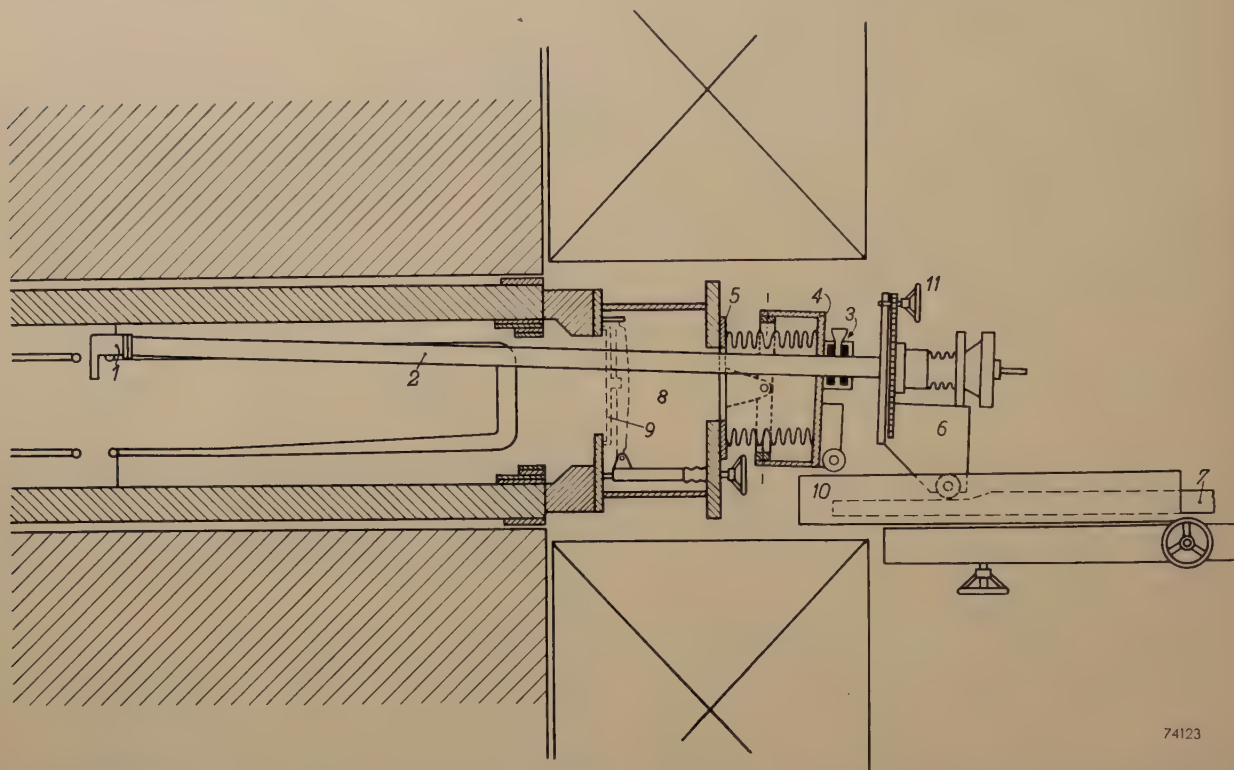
Holder and controls of the ion source. 1 ion chamber with nozzle; 2 tube carrying ion chamber, containing insulated tube for the cathode and cooling tube for the chamber walls. The end of the long tube is supported by a bearing on carriage 6. Plate 4 is another bearing in which the tube slides through a vacuum-tight gland 3 (consisting of two rubber seals with vacuum oil between them). The ion source can be inserted more or less deeply into the acceleration chamber by means of a handwheel 11. Further, plate 4 can be tilted in two directions with respect to the flange 5 to which it is attached by spring-brass vacuum-tight bellows, enabling the ion source to be moved up and down or sideways in the Dee gap. That position of the ion source which yields the highest beam current can thus be found while the cyclotron is operating. In order to withdraw the ion source from the acceleration chamber, for example to renew the tungsten pin, the carriage 6 is pulled back along the rails 7. When the ion source reaches the vacuum lock 8, the cover 9 is closed (see fig. 8) and the flange 5 can then be loosened; the flange, with plate 4 and the whole ion source assembly, is then retracted on the rails 10 which are first raised so that the wheels on plate 4 come to rest on them.
